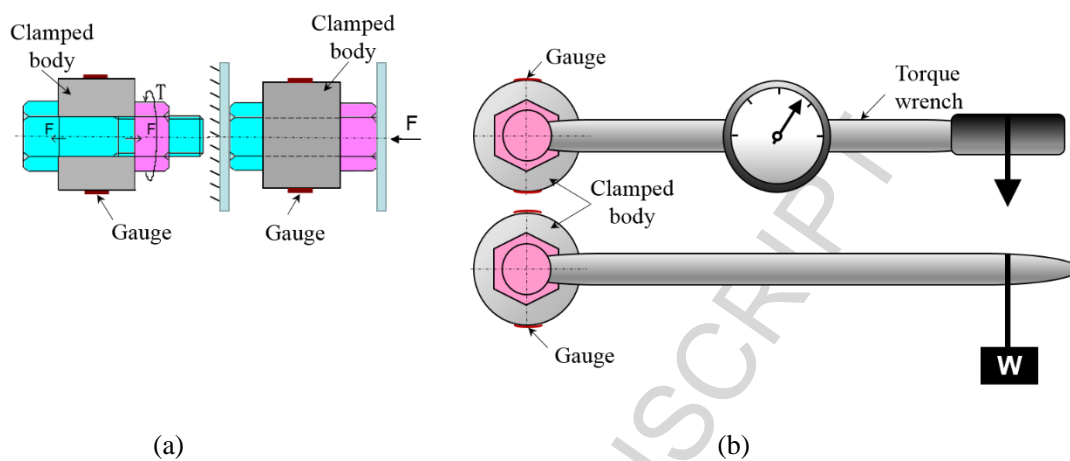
(a) Calibration method for bolt axial force measurement and (b) Calibration method for torque wrench
